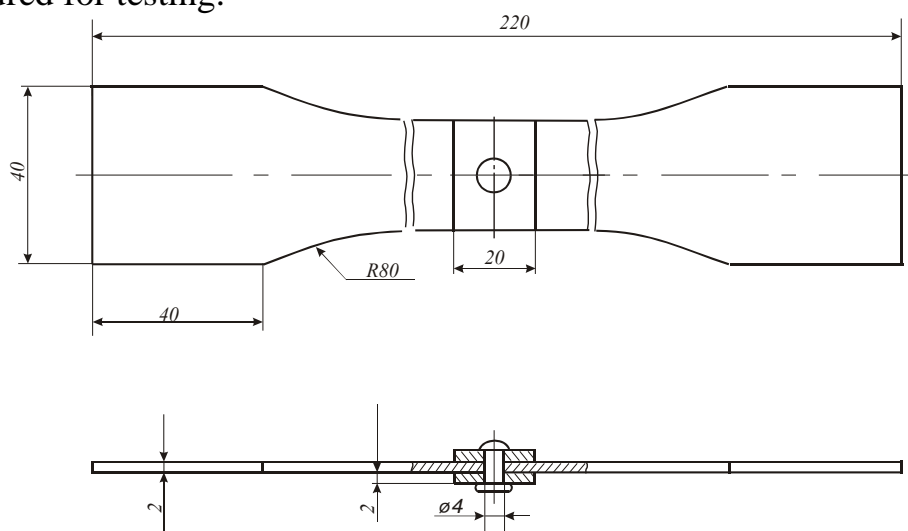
Test-pieces of plates from Д16АТЛ2 sheet with unloaded hole filled with rivet 4-11 as specified in OCT1 34040-79
